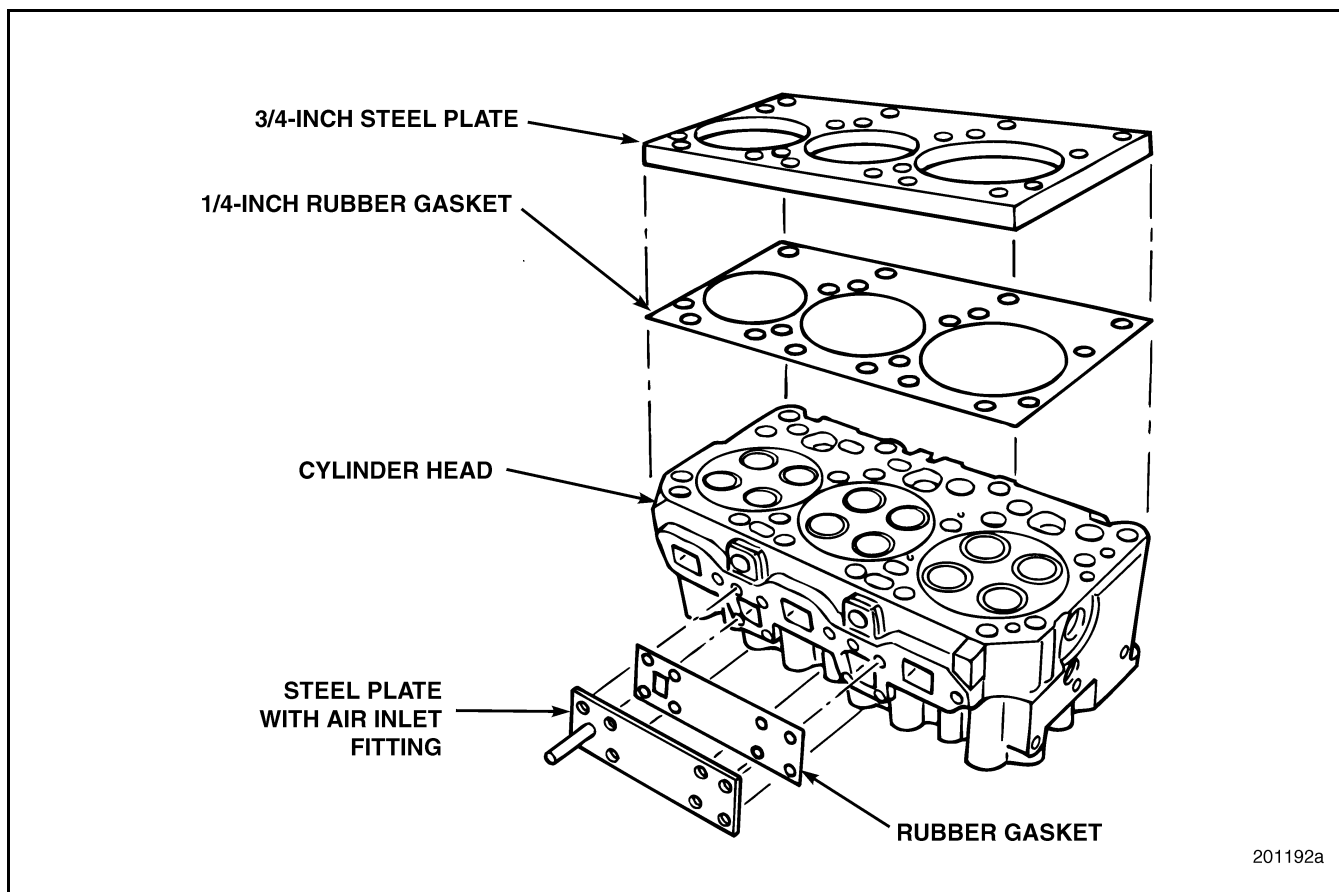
Cylinder Head Coolant Passage Leak Check (Out of Chassis)
